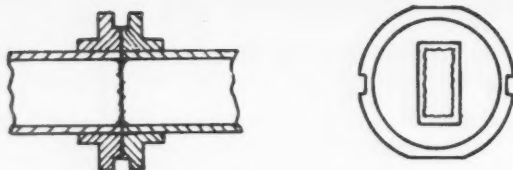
Flanged waveguides assembled with burrs on the windows causing reflections.
